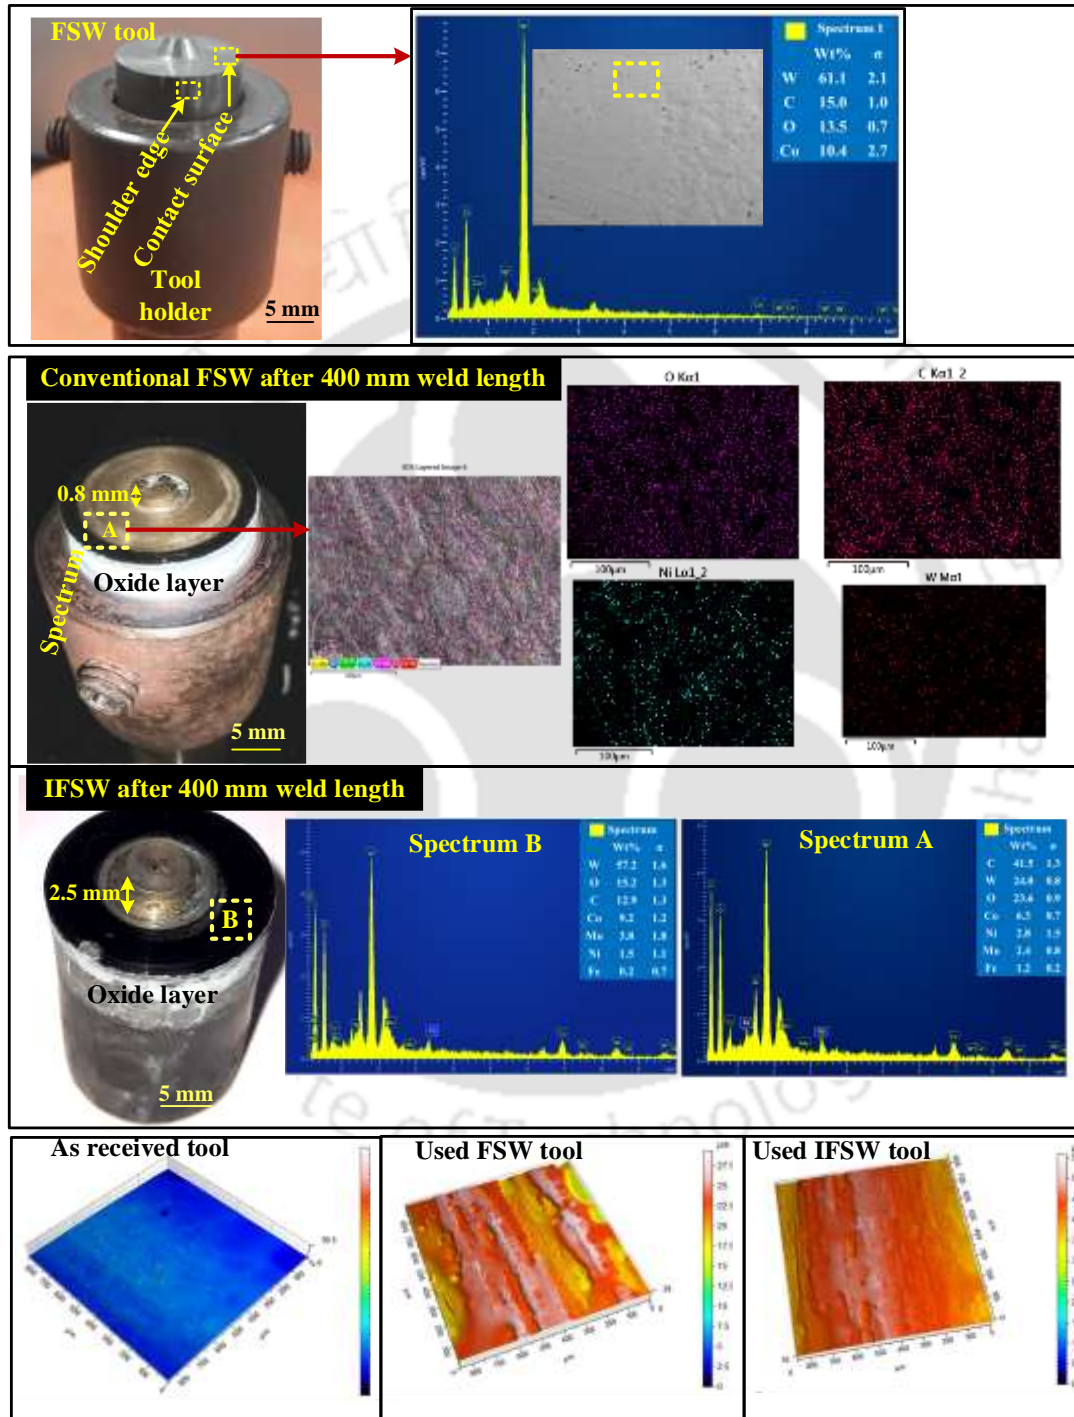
Top view of friction stir welding tool (a) as received, (b) used in FSW, (c) used in I-FSW and (d) its corresponding surface topology.
